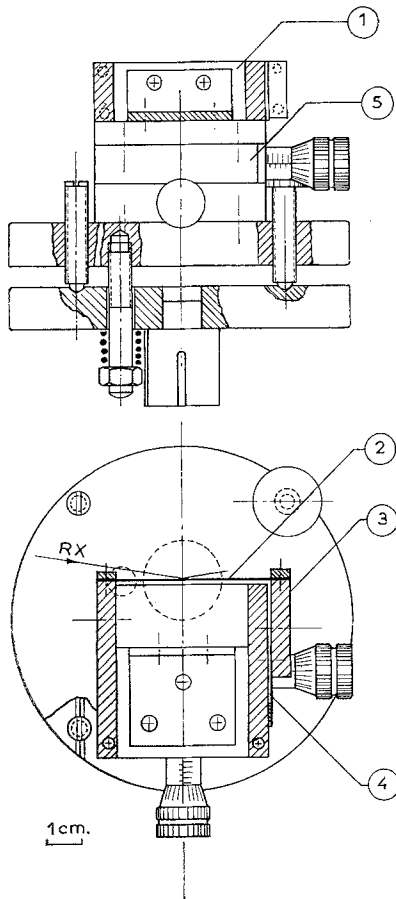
Goniometer head assembly. 1, Ceramic insulating block; 2, specimen; 3, mobile electrode; 4, steel spring blade; 5, ball slide.
